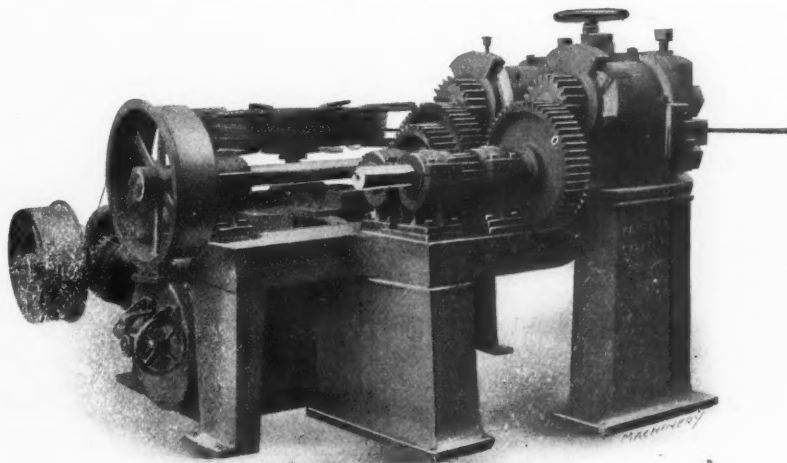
Opposite Side of Kane & Roach Machine shown in Fig. 1
